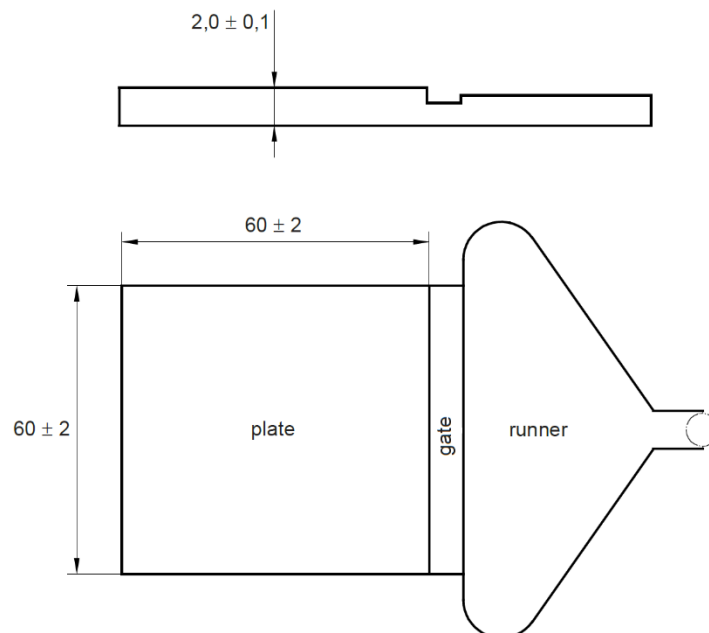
Square plate specimen dimensions in mm according to ISO 294-3.
